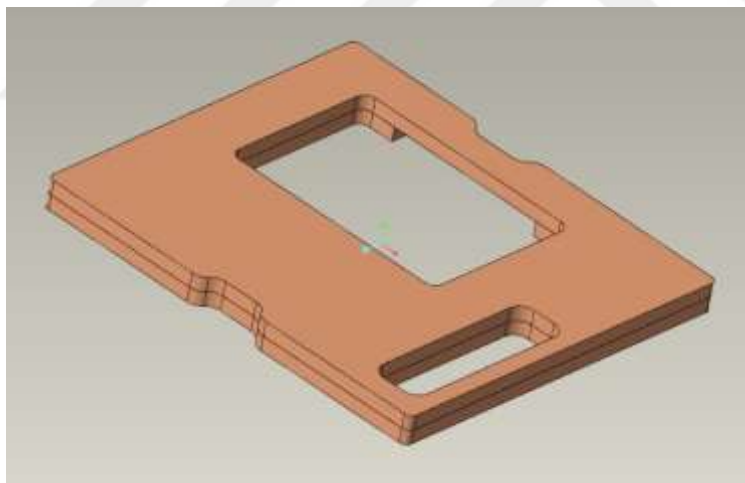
Honeycomb bottom part for induction hob model.
